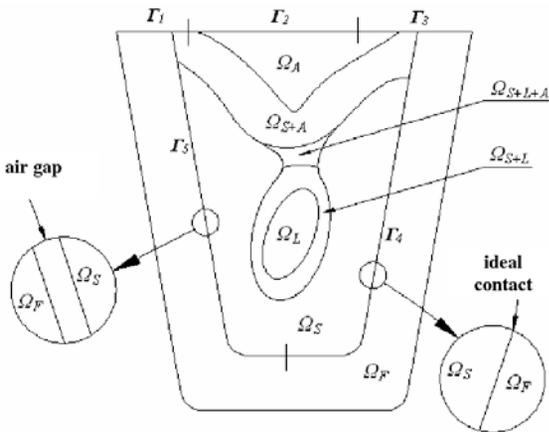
Mould and casting consisted of regions filled with mixture of the solid, liquid and gas
